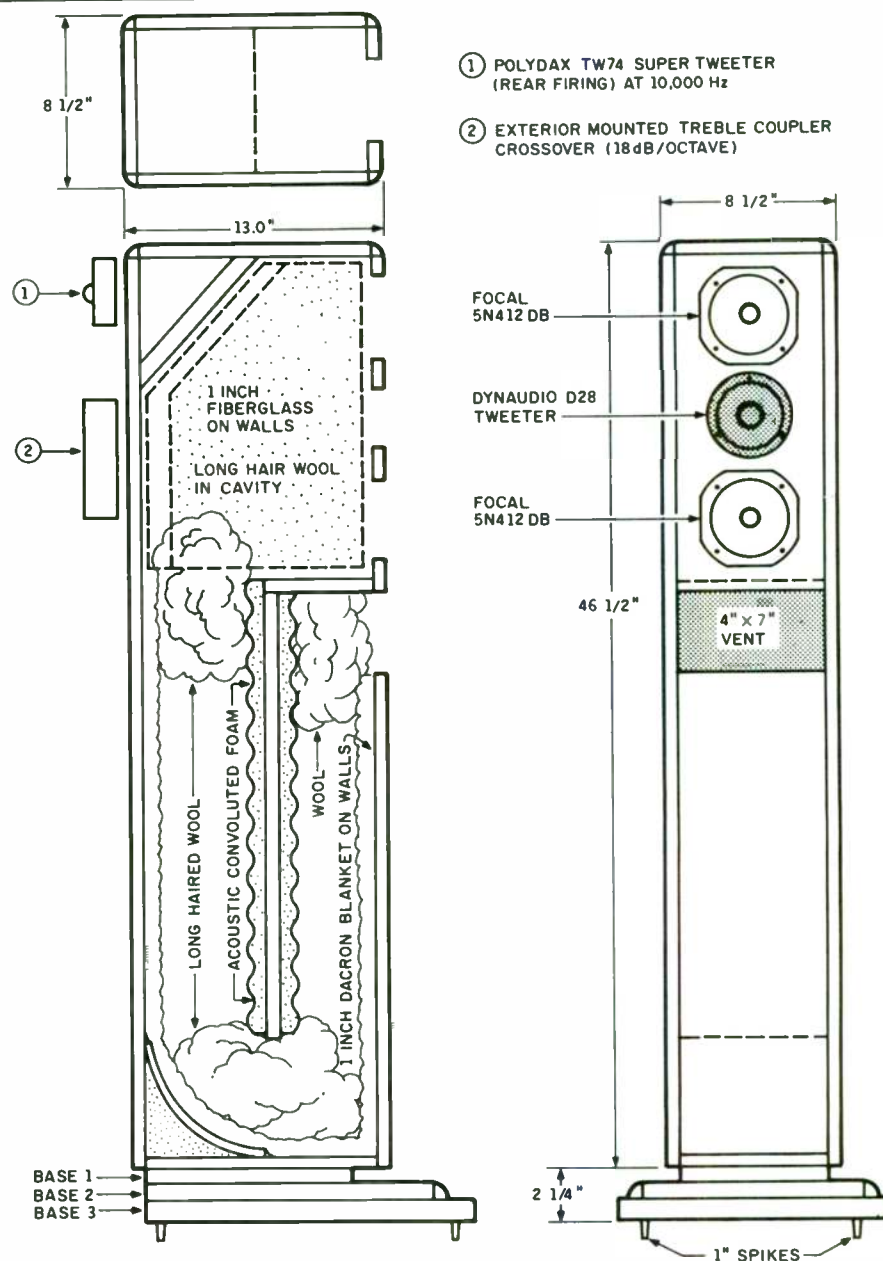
Cutaway view and overall dimensions of the "Baby Swan."
